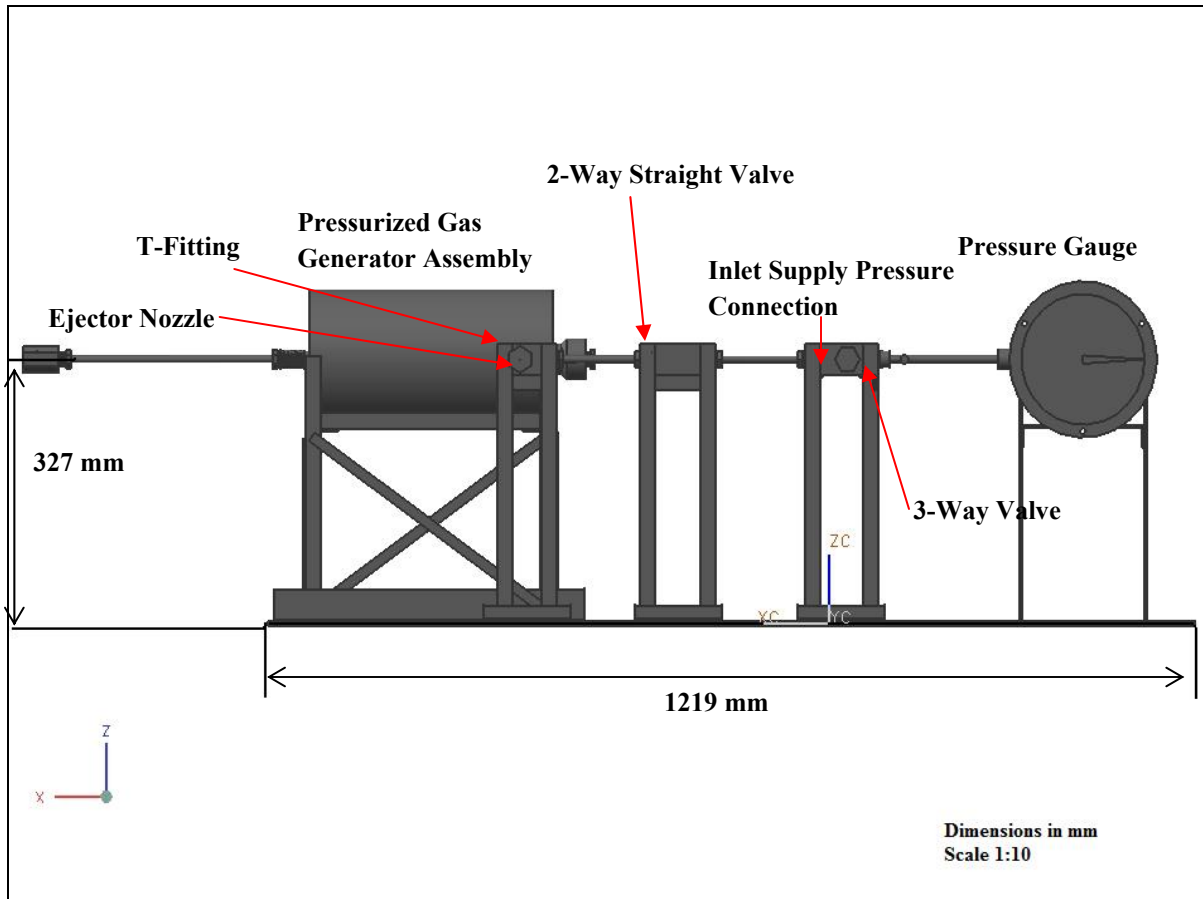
CAD Figure of the Pressurized Gas Generation Assembly with Front View (Scale 1:10).
